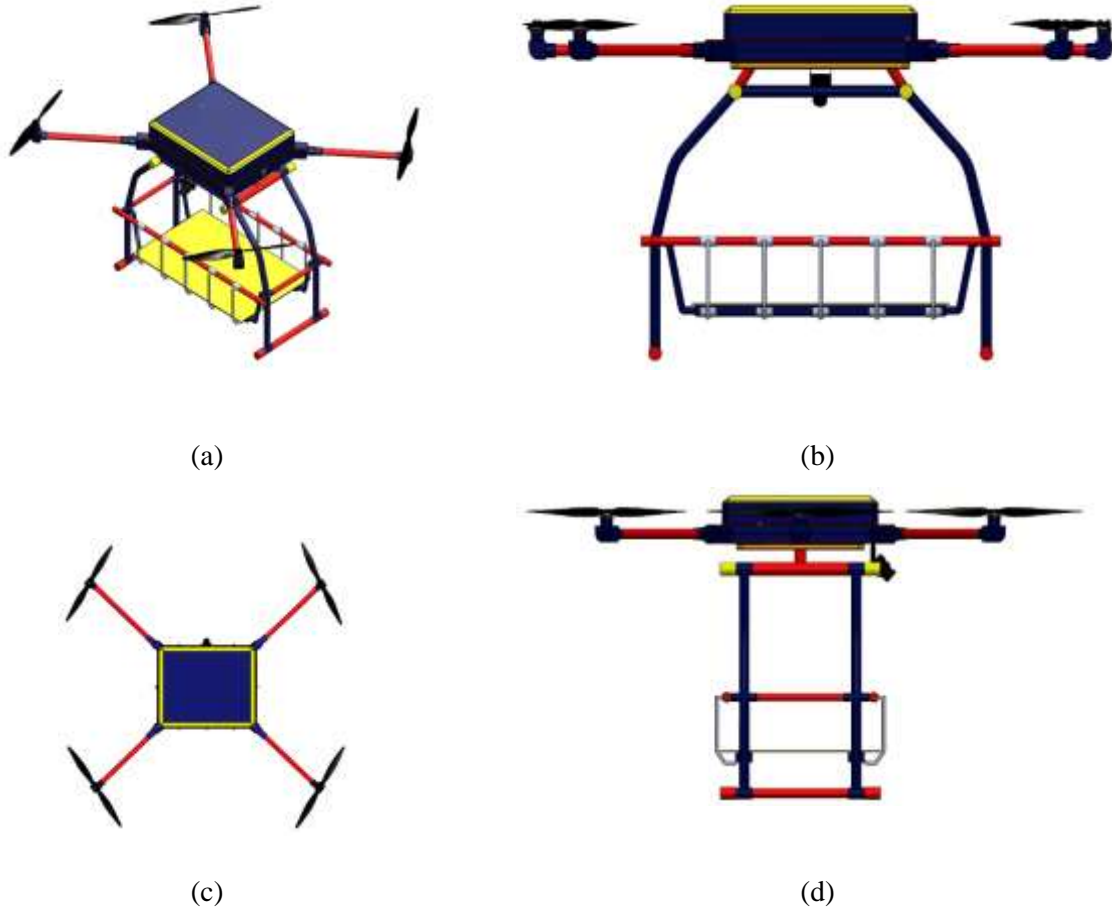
Drone Design (a) Isometric View, (b) Front View, (c) Top View, and (d) Side View
